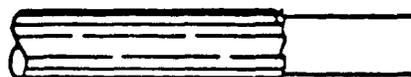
CUTTING OF COAXIAL CABLE FOR CONNECTOR ASSEMBLY INSTRUCTIONS
